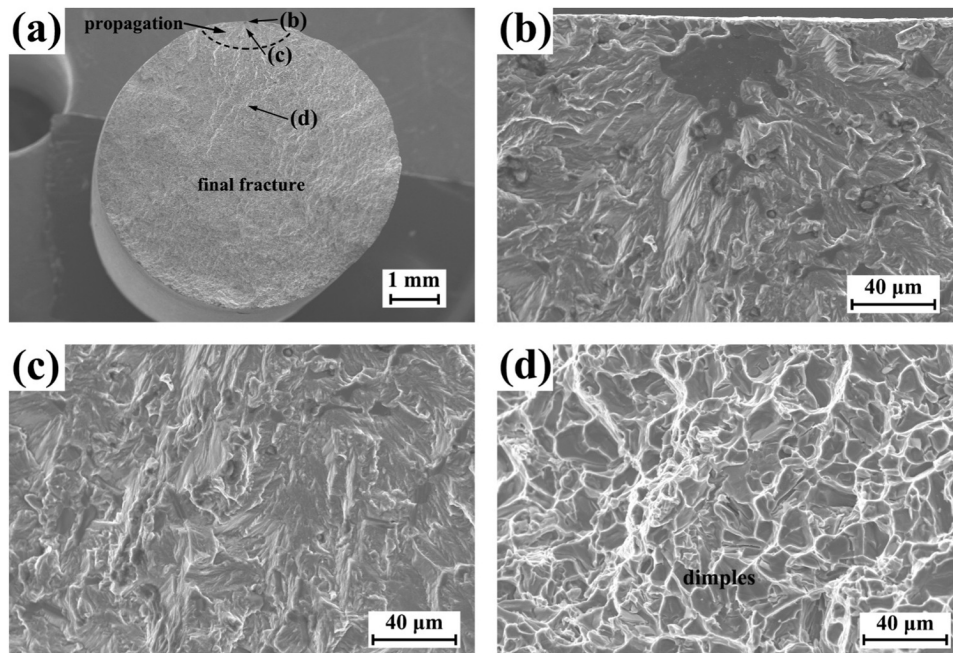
Fracture surfaces of the AF-A360 specimen,  $S_{max} = 200$  MPa,  $N = 210,552$ . (a) global view, (b) fatigue initiation, (c) crack propagation, (d) final fracture.
